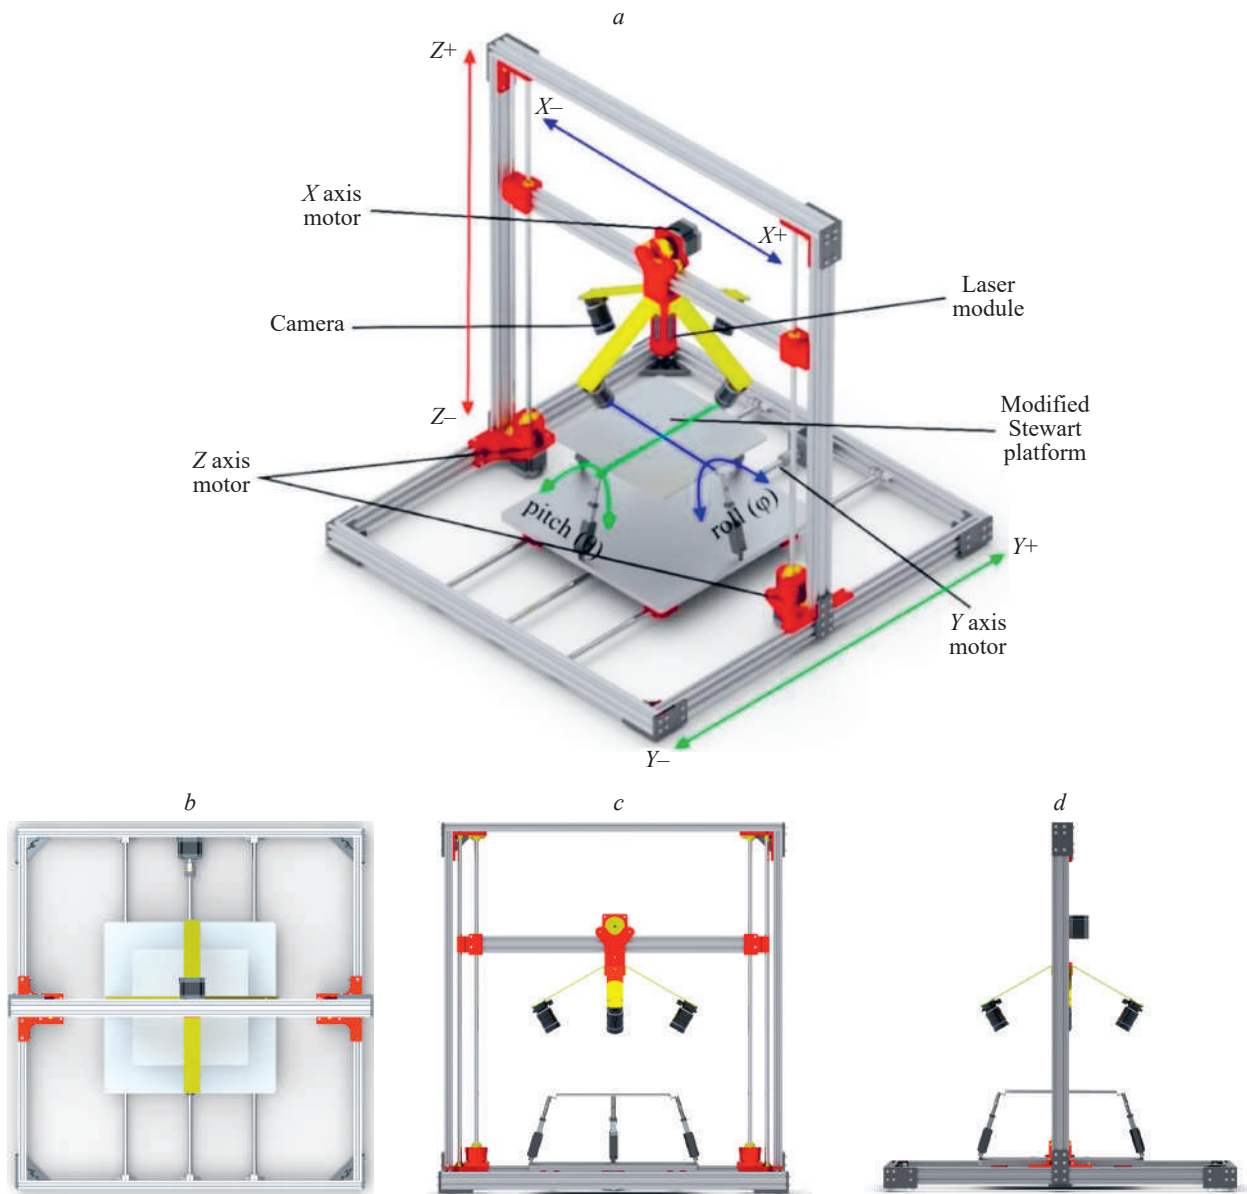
Design of an adaptive laser mechanism: isometric view (a); top view (b); front view (c); side view (d)
